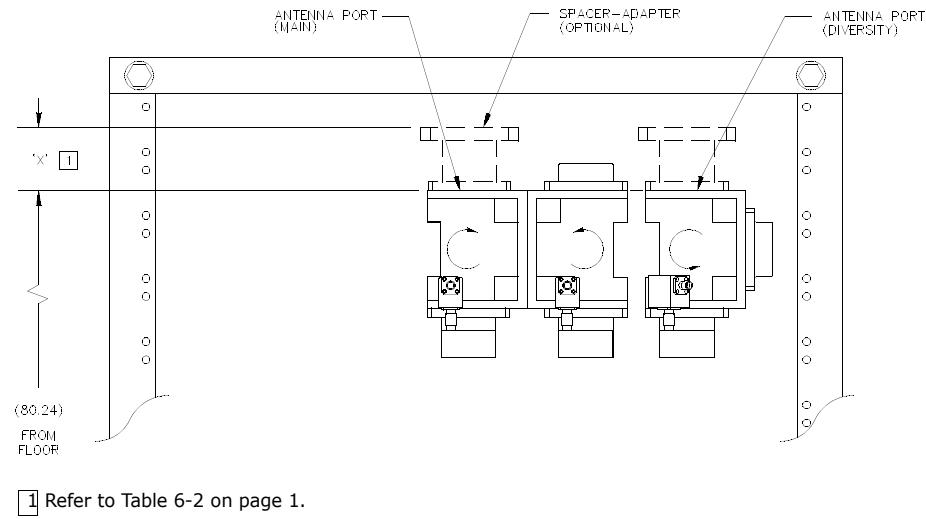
ACU, hot-standby/frequency-diversity, 2-antenna (T/R, T/R) (top view), mechanical drawing
